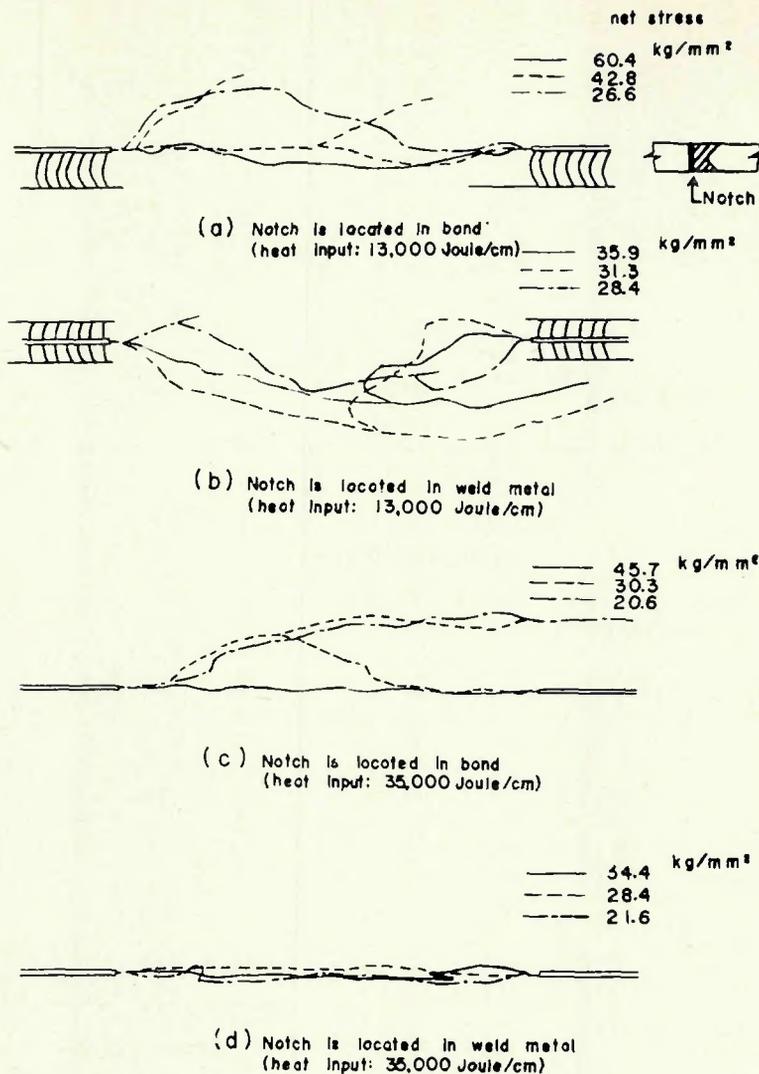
Crack path in welded specimen for HT 80 (steel L)
